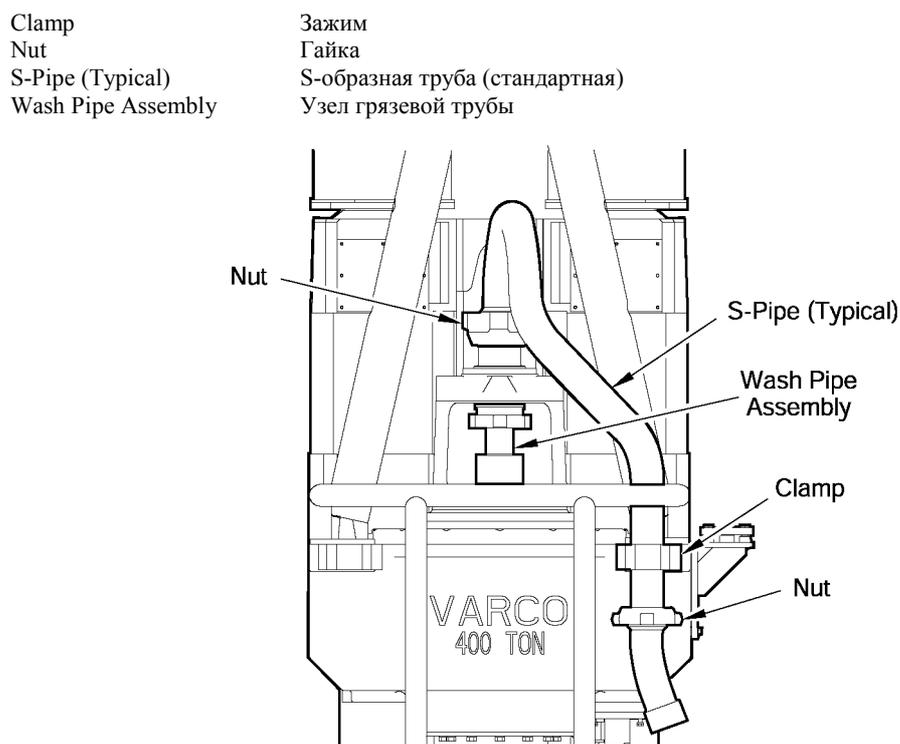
Disconnecting the S-pipe and wash pipe assembly
